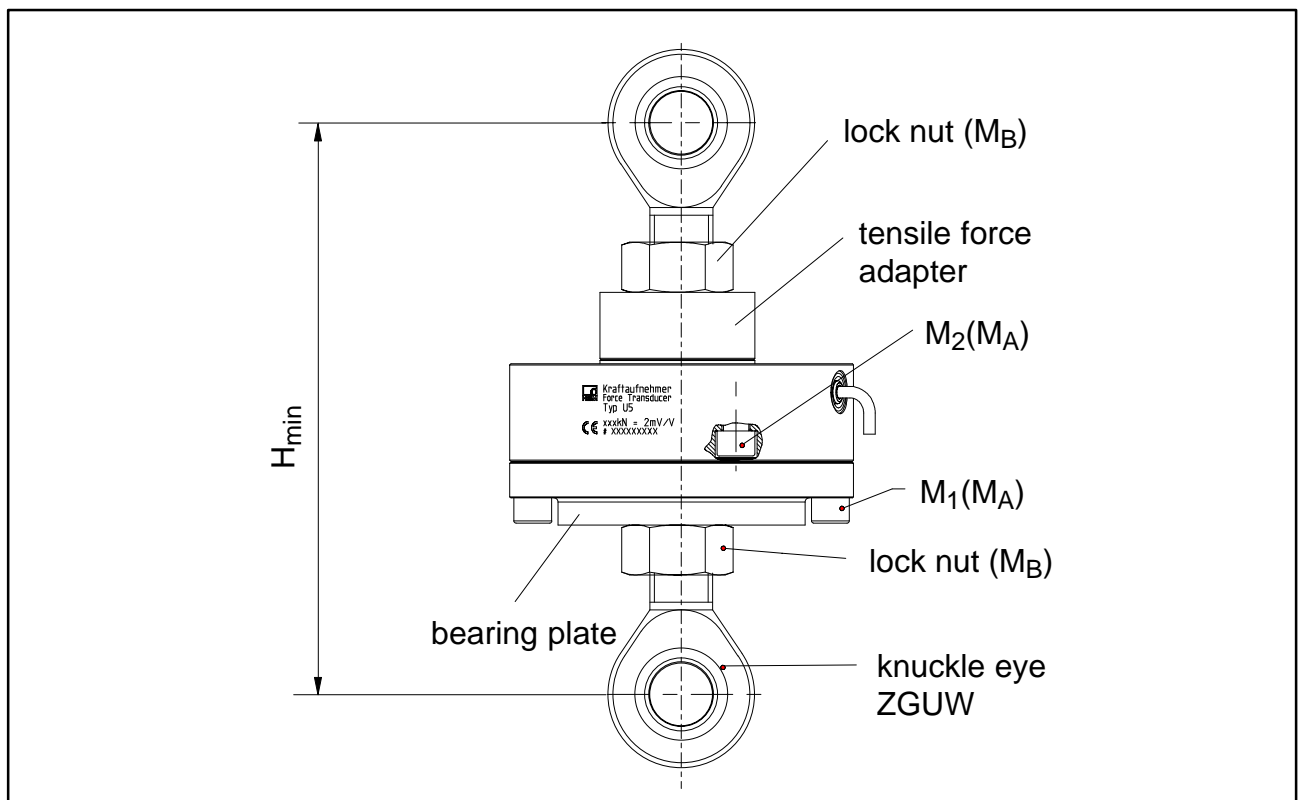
Installation for tensile loading with two knuckle eyes
